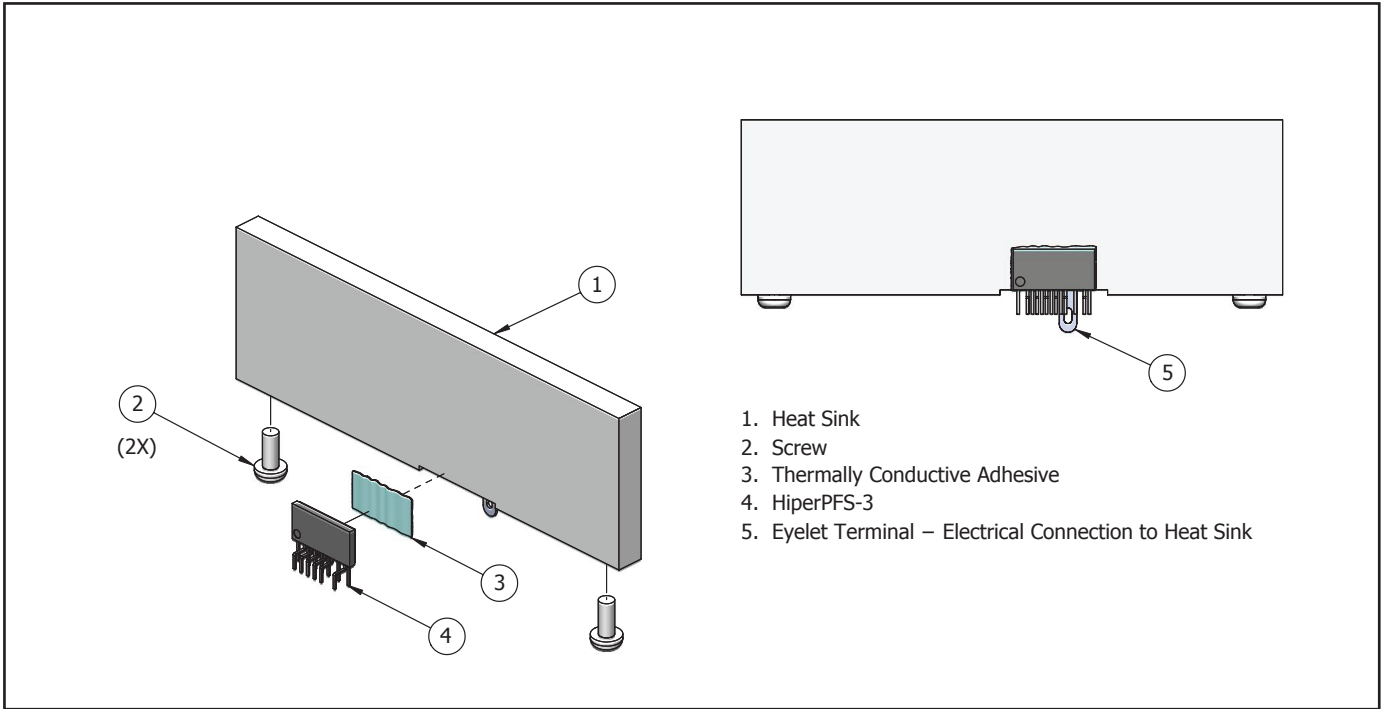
Heat Sink Assembly – using Thermally Conductive Adhesive.
